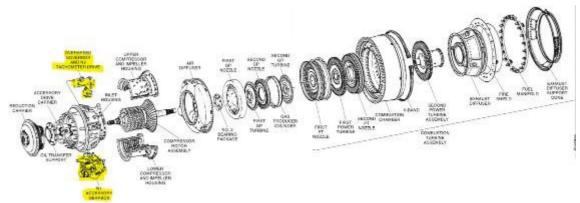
T53 ENGINE EXPLODED VIEW; COURTESY OF OZARK AEROWORKS LLC
